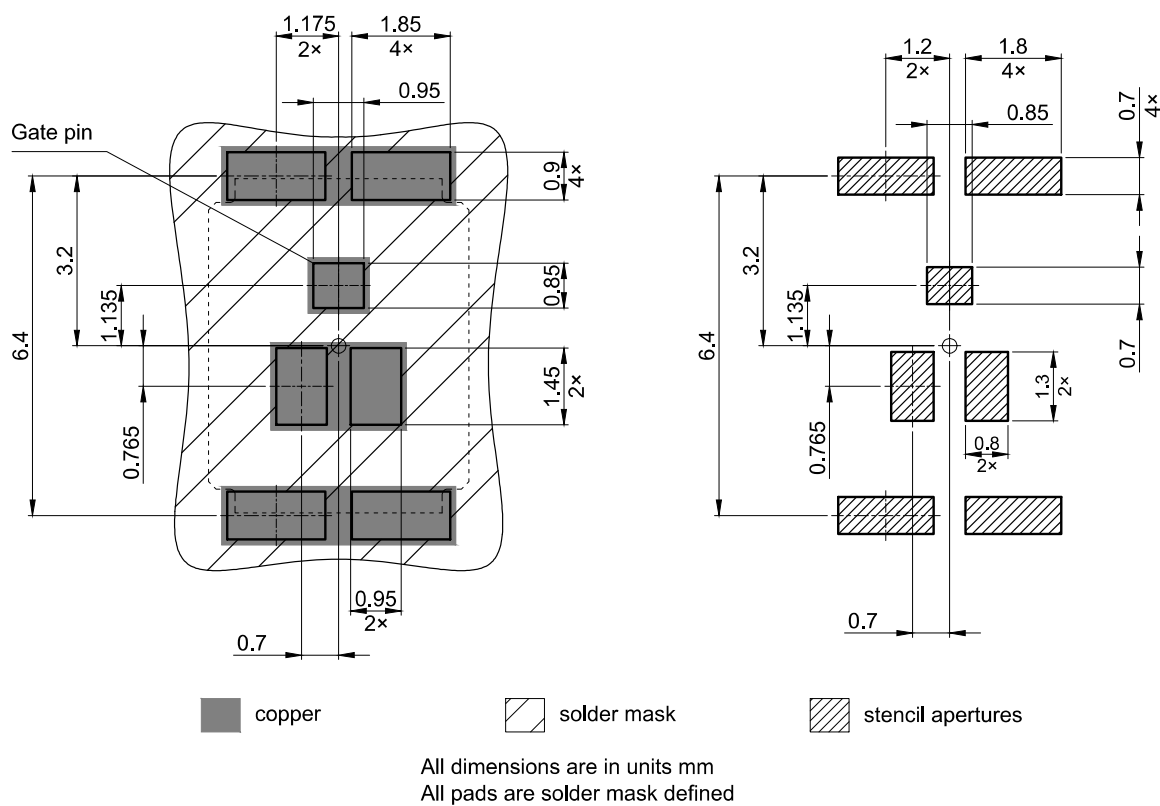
Outline Footprint (MG-WDSO5-5), dimensions in mm
